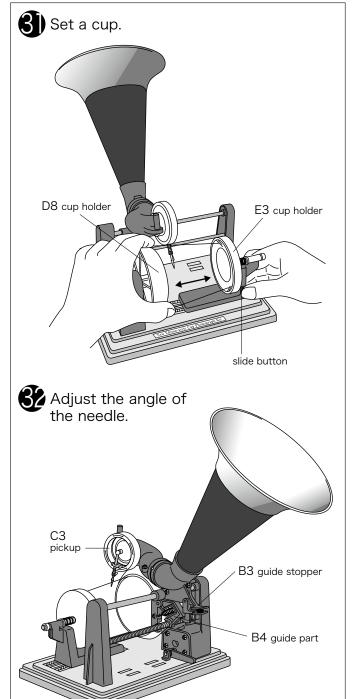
Figure — Push up the B3 guide stopper lightly. Slide the pickup arm toward the motor box holding the elbow part.
